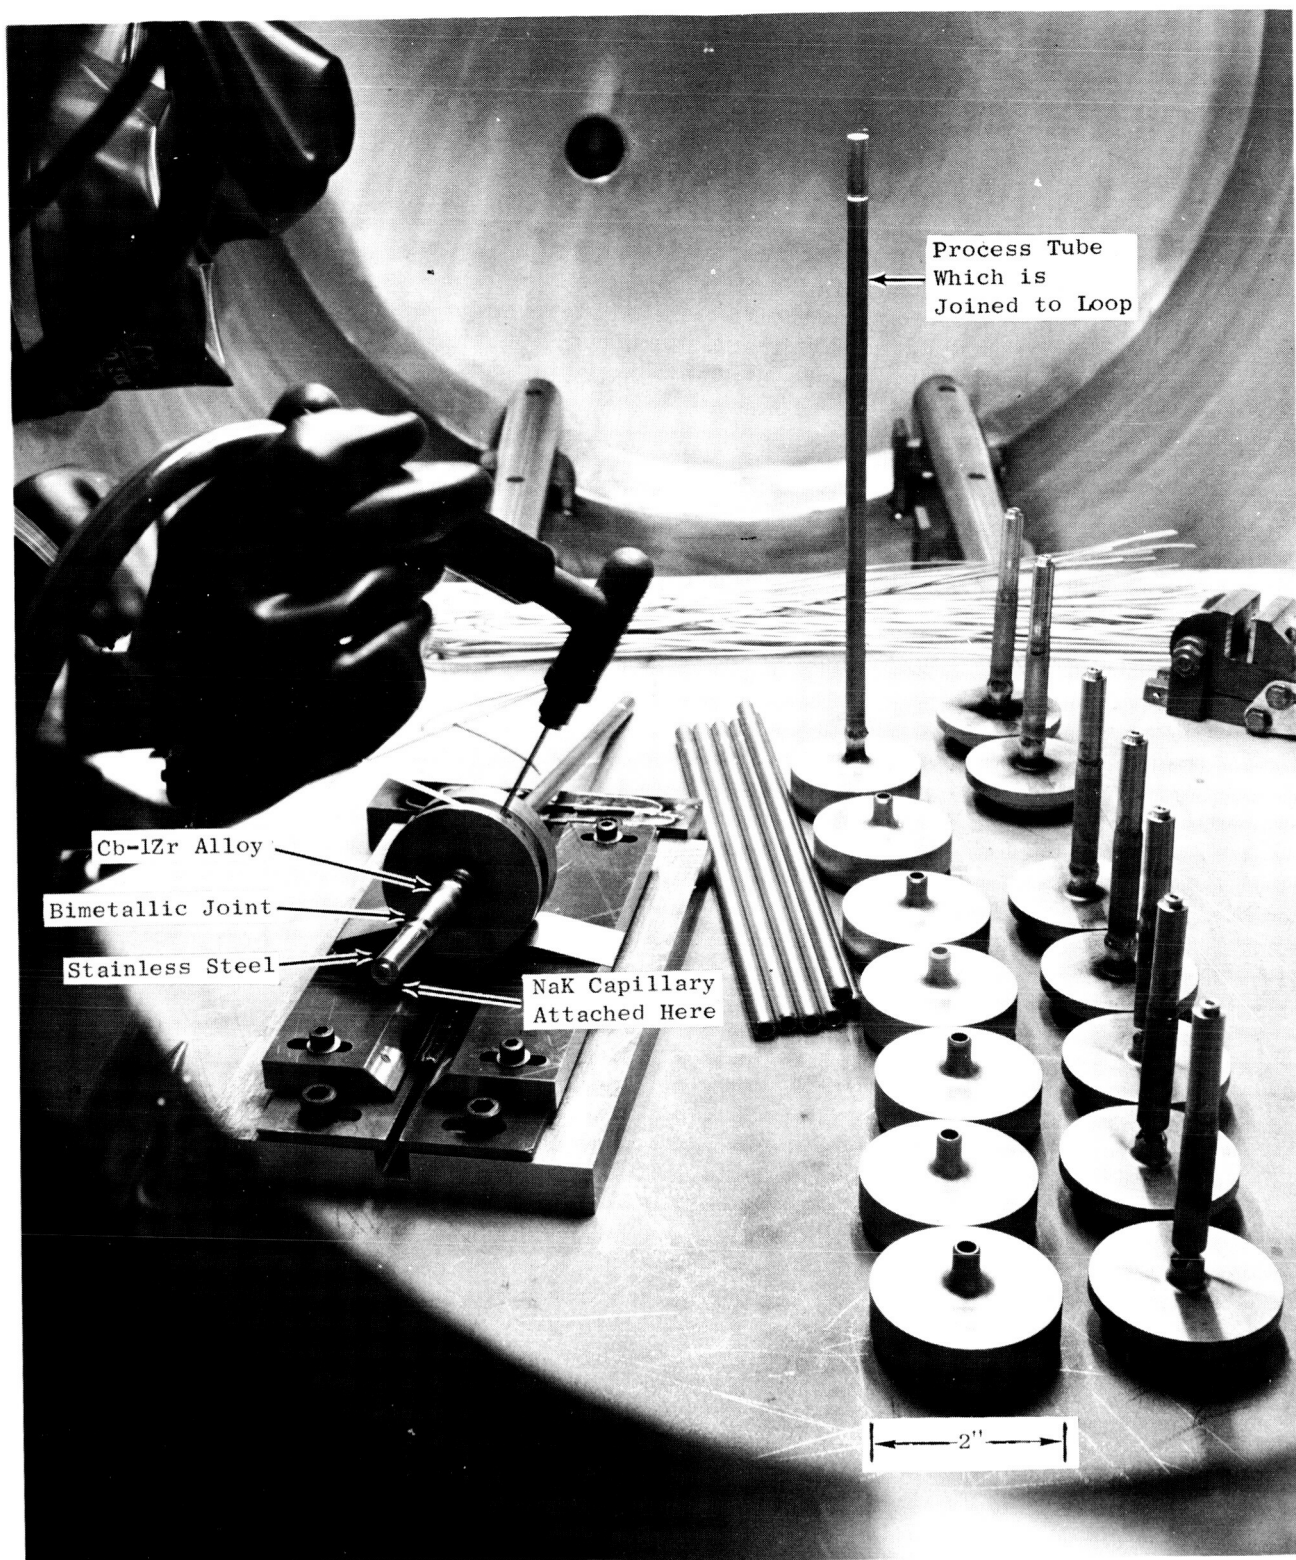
Welding of Cb-1Zr alloy slack diaphragm pressure transducer housing.
